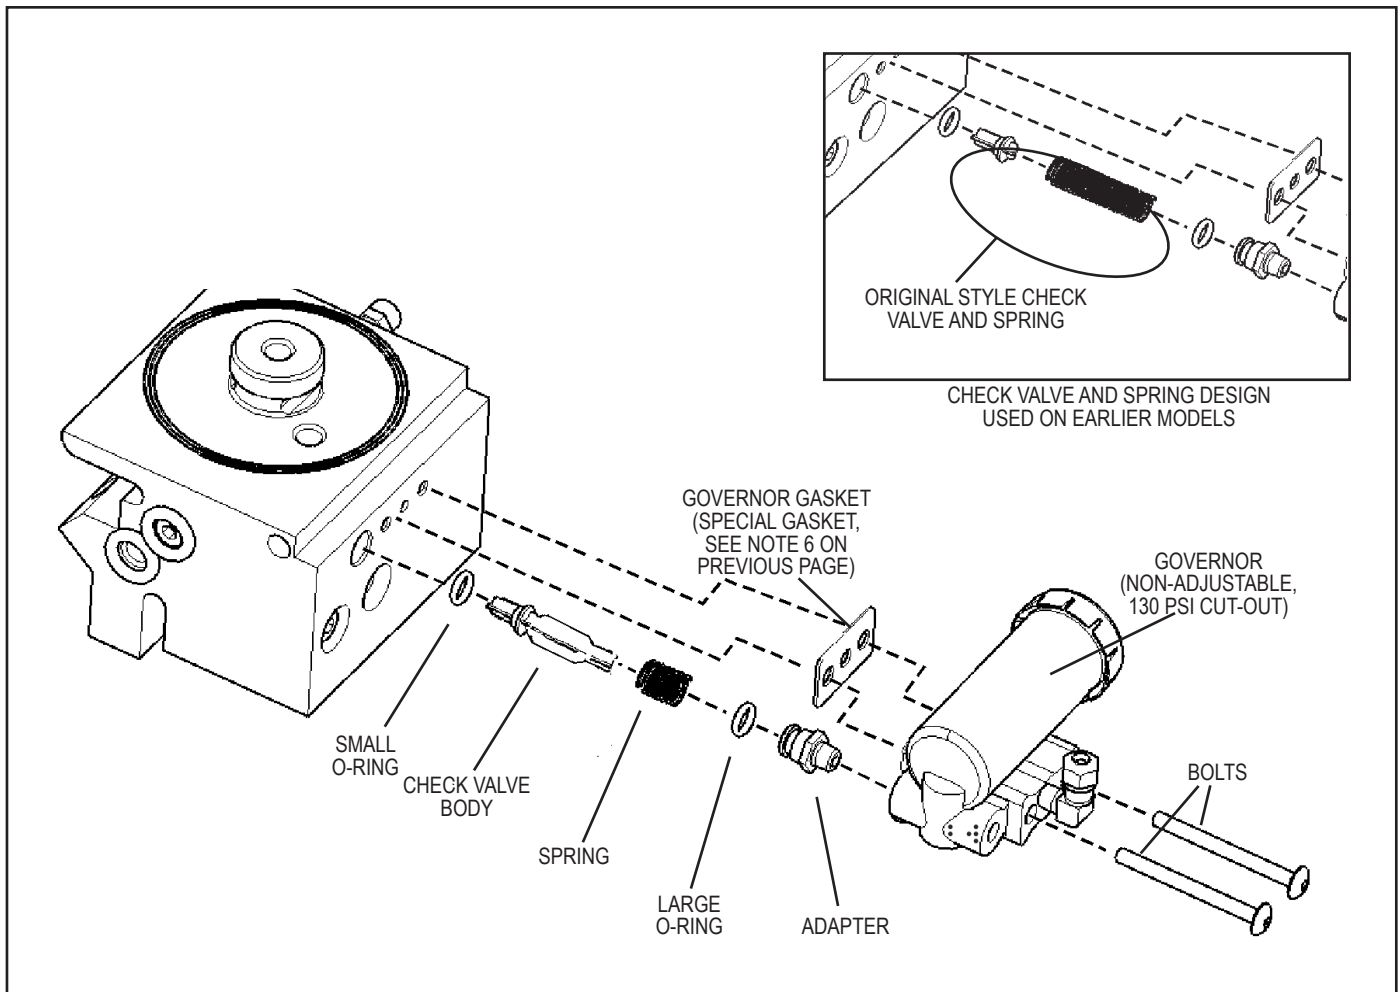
BENDIX® AD-IS® AIR DRYER DELIVERY CHECK VALVE
